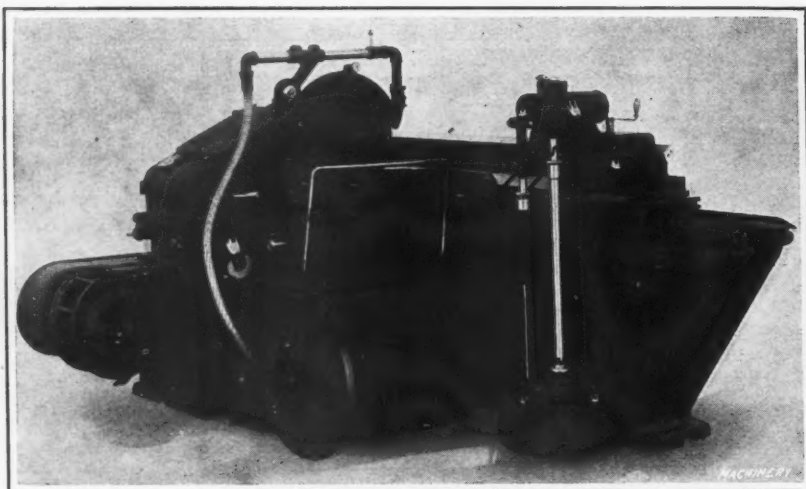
Rear View of Grinding Machine, showing Arrangement of Settling Tank
